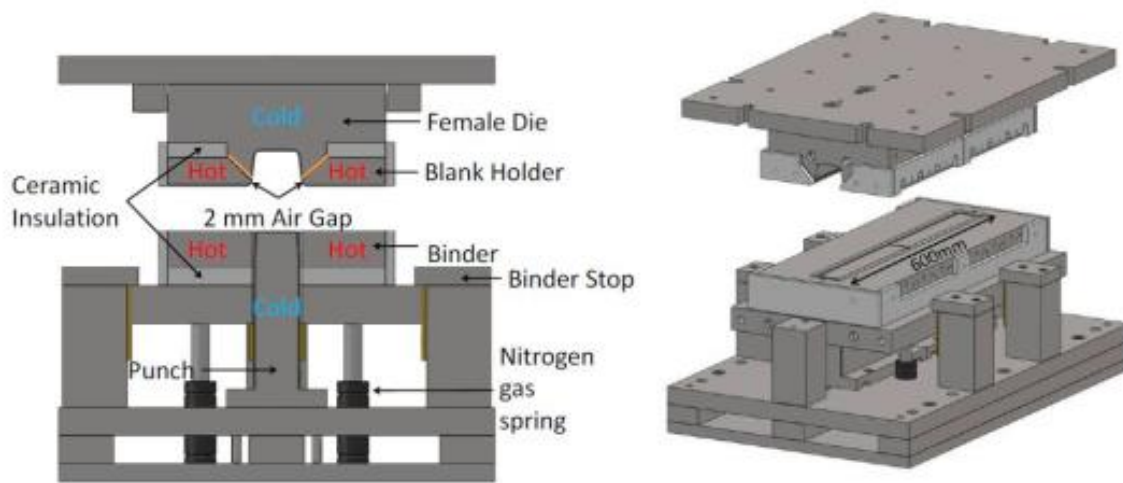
Schematic of the tooling used to form soft flange hat sections, where the entire punch and die are water cooled, while binder and blank holder are heated
